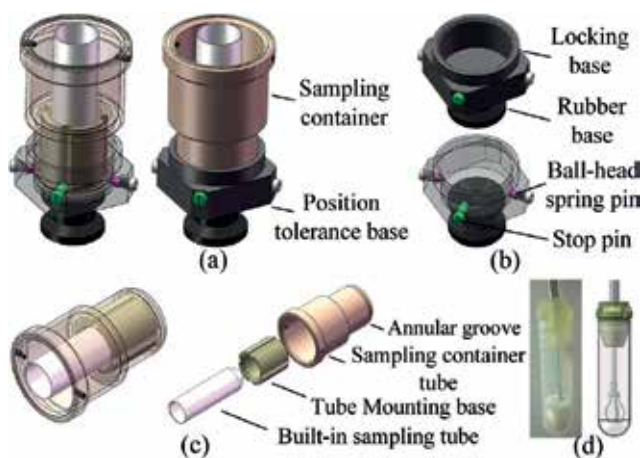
The sampling container and mounting base: (a) sampling container and mounting base, (b) position tolerance base, (c) the components of the sampling container, (d) built-in sealed sampling tube.
